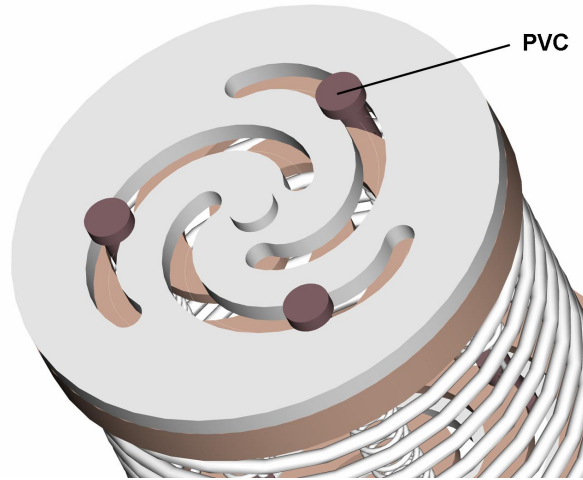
The mechanisms of the prototype for adjusting the distance between the NiTi springs
